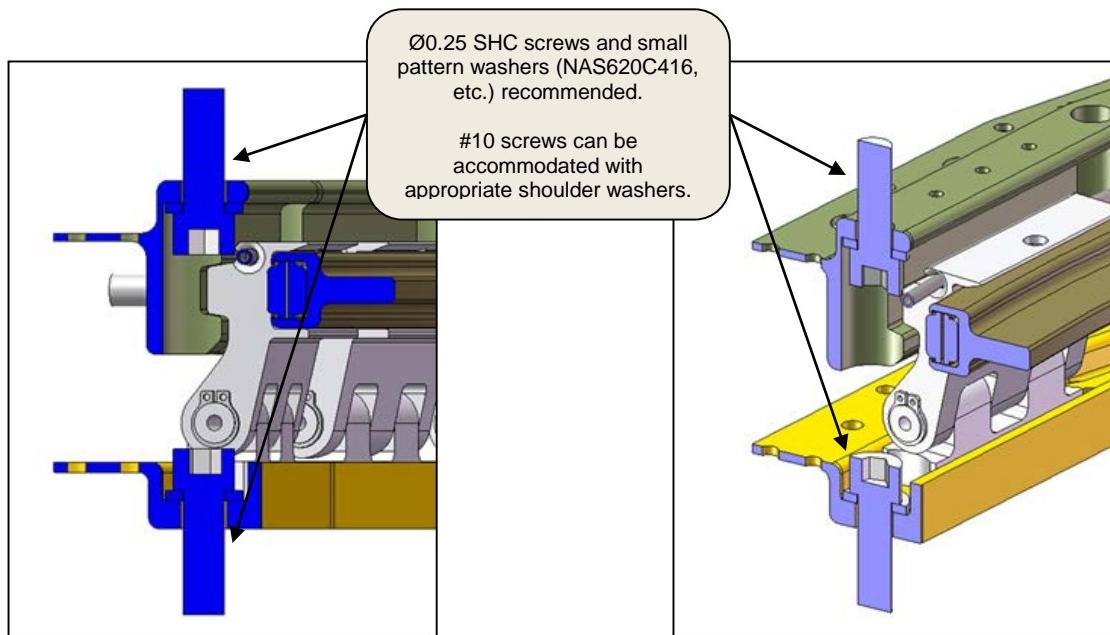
1/4 inch fasteners from Lightband to adjoining structures
